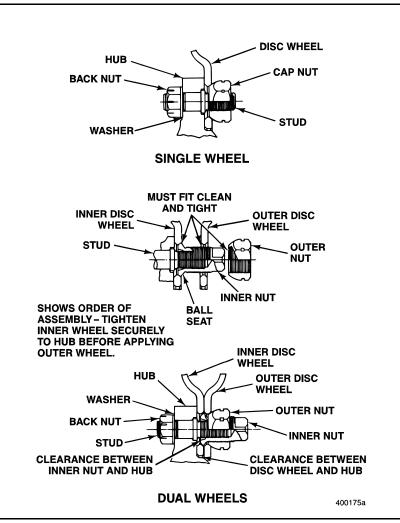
Disc Wheel Assembly (Stud Piloted Ball Seat)
